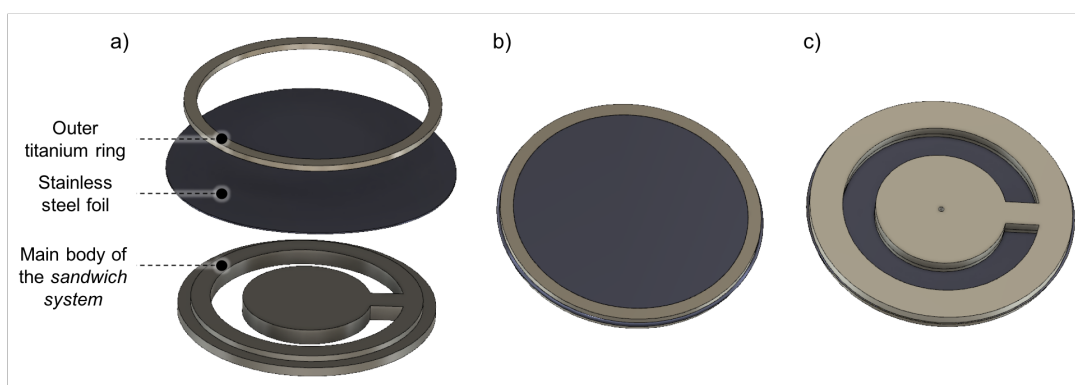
Sandwich system* for the foil: a) in the process of assembling; b) top view (assembled) and c) bottom view (assembled).
